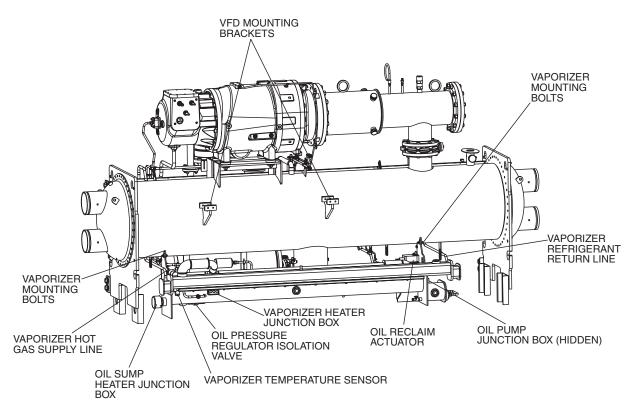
Oil Concentrator Removal, Q and R Compressors (Unit with R Compressor Shown)
